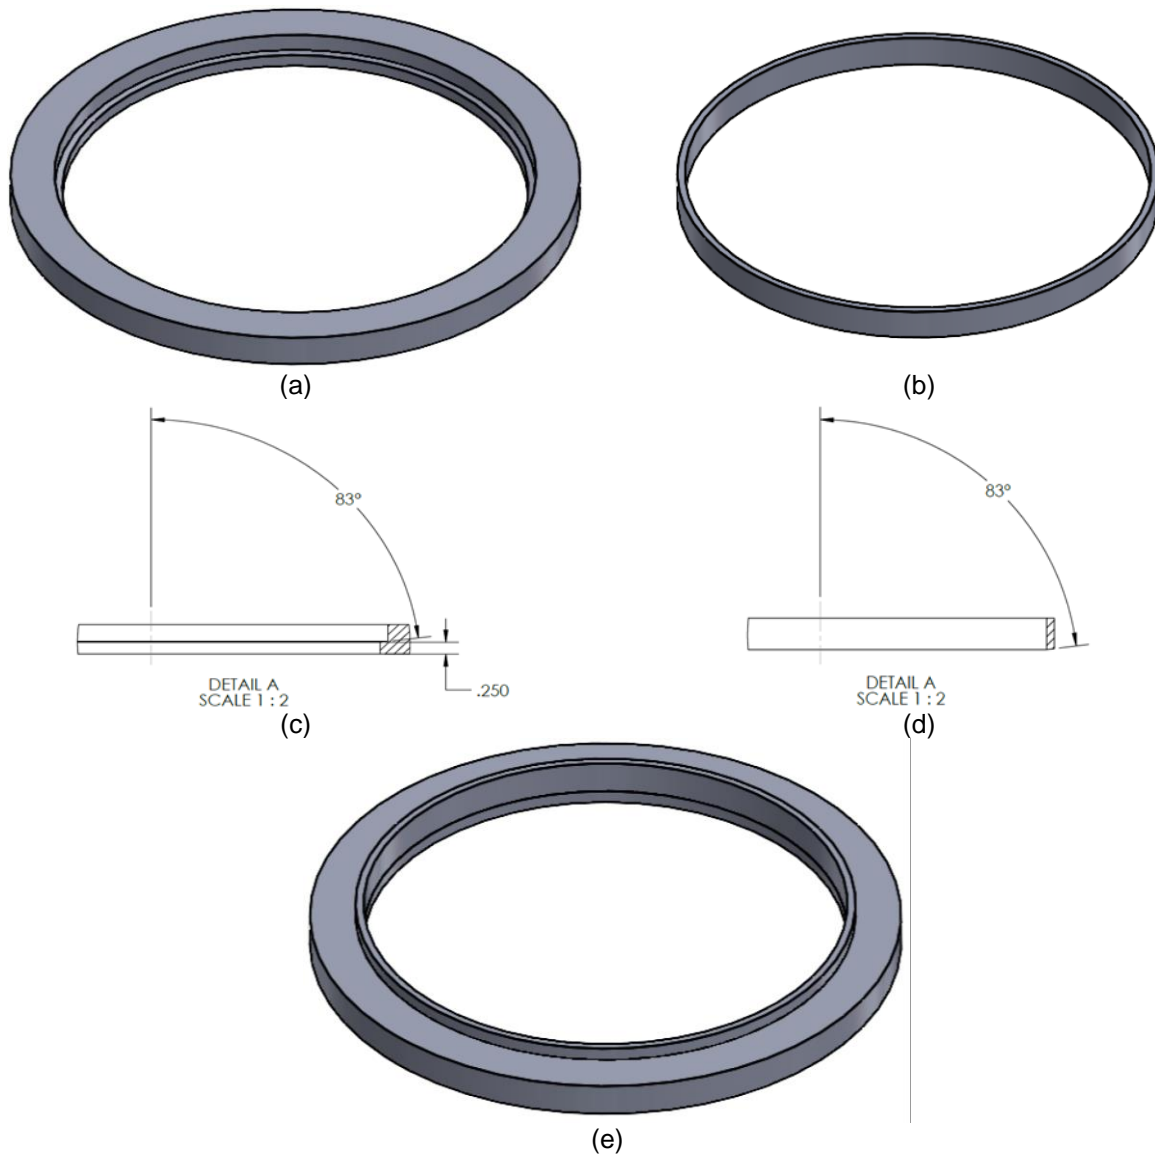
Drawing of the test pieces demonstrating the (a) flange, (b) hemi, (c) angle of the step joint in the flange, (d) angle of the joint in the hemi, and (e) the assembly of the flange and hemi.
